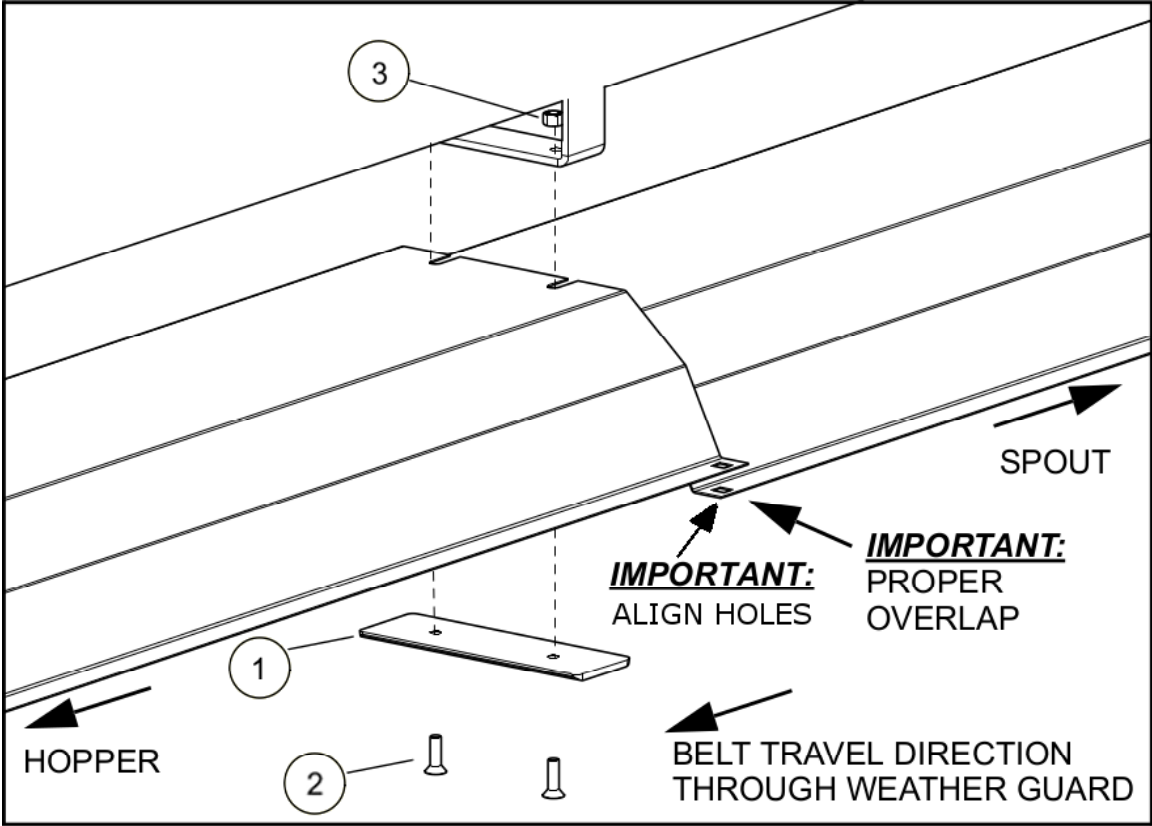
Weather Guard Section Locations (Batco and Westfield)
